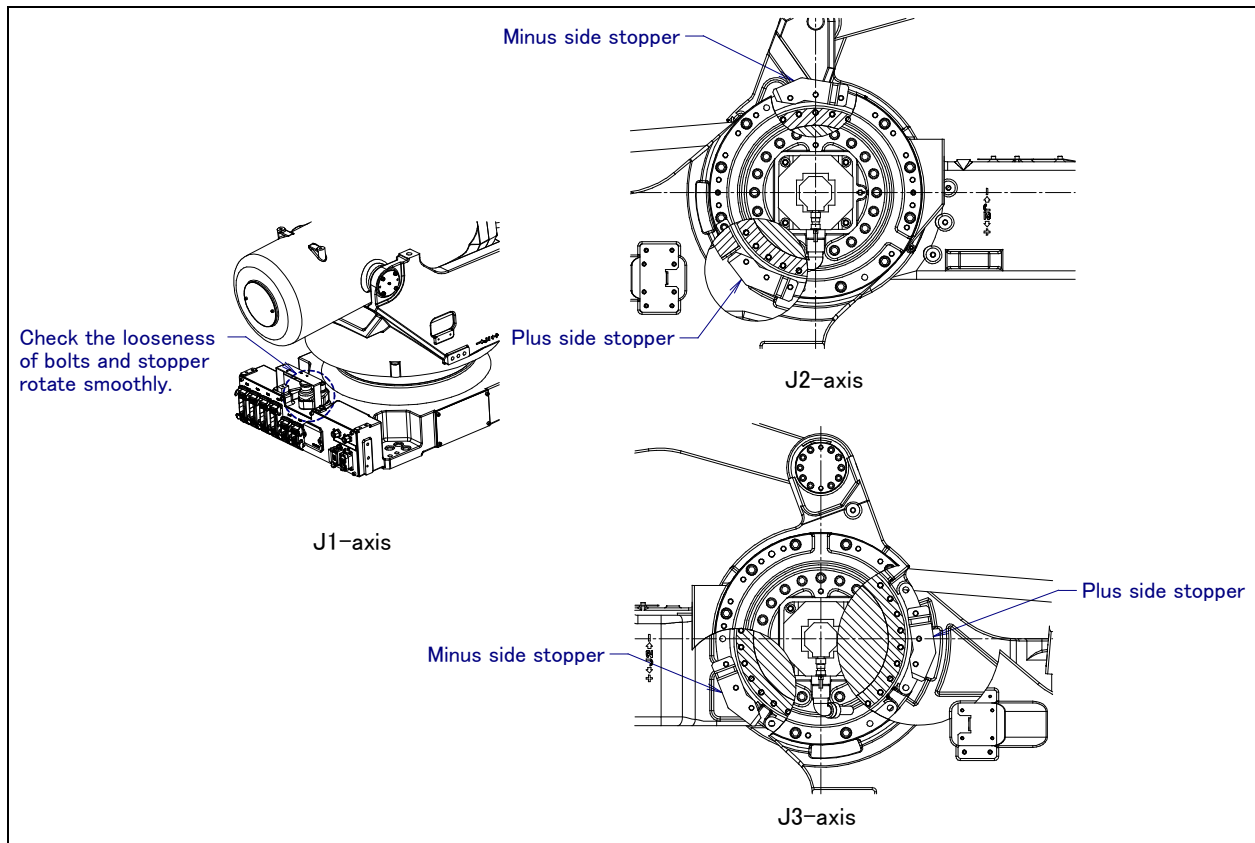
(c) Check of mechanical stopper and adjustable mechanical stopper
